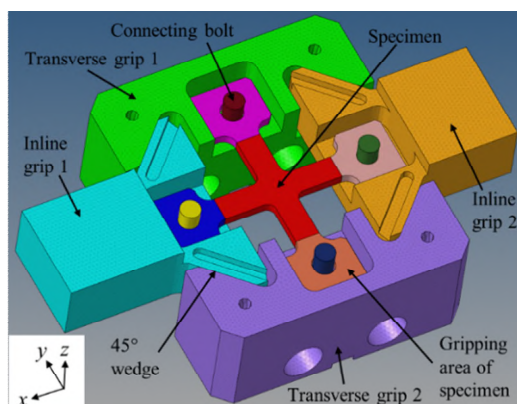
FE model of the assembly consists of the grips, connecting bolts and the specimen
